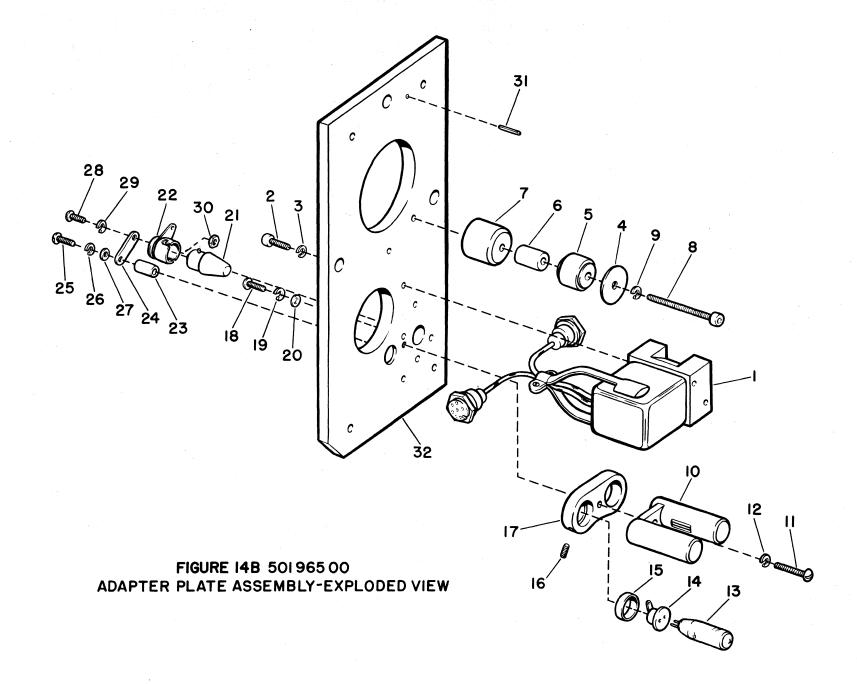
B ADAPTER PLATE ASSEMBLY-HSP
